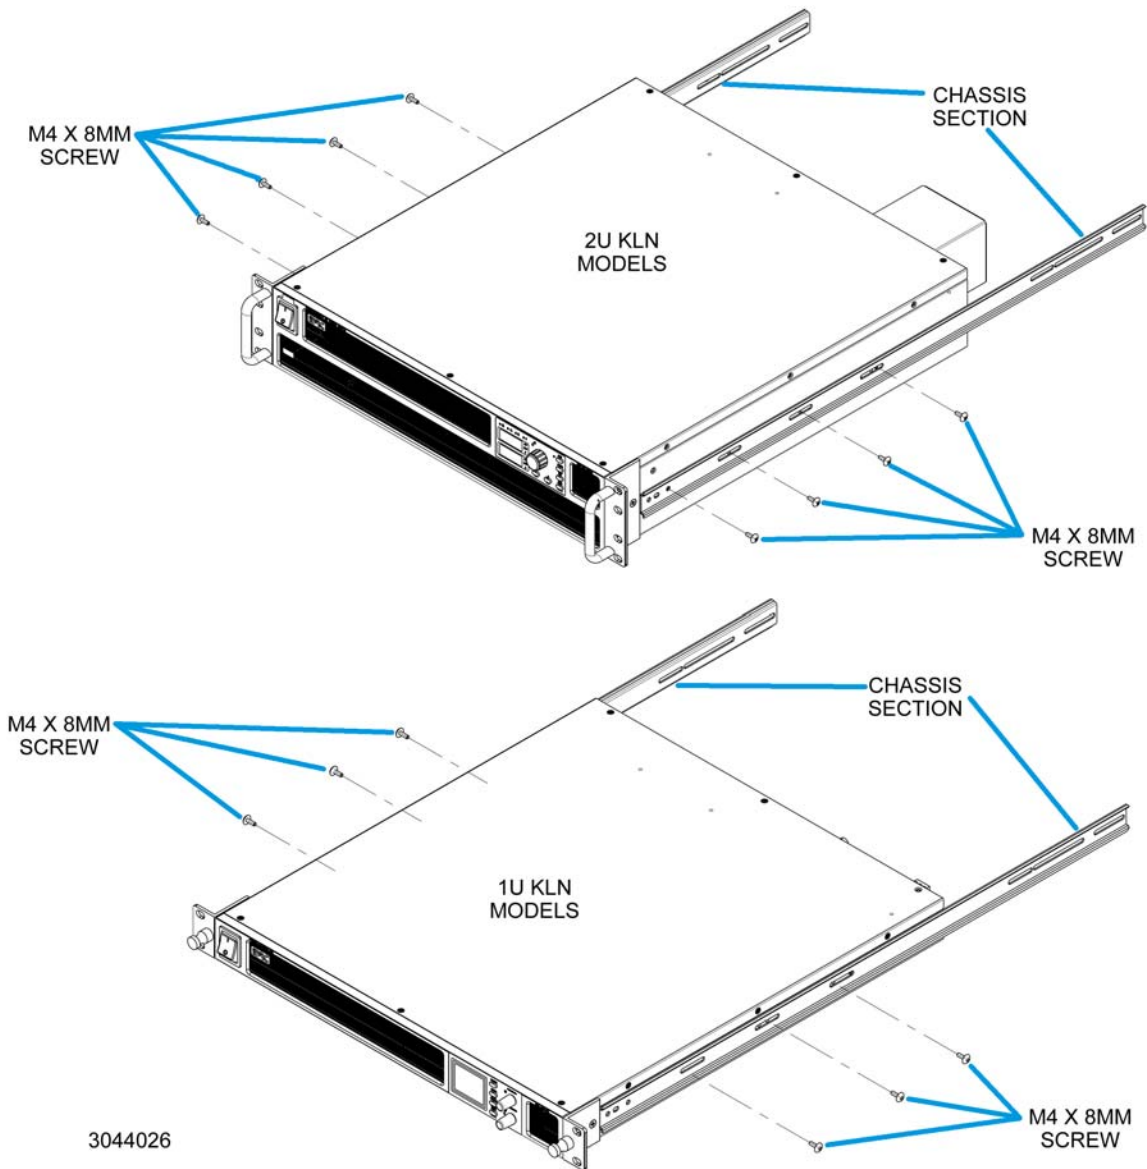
ATTACHING CHASSIS SECTION TO POWER SUPPLY.
